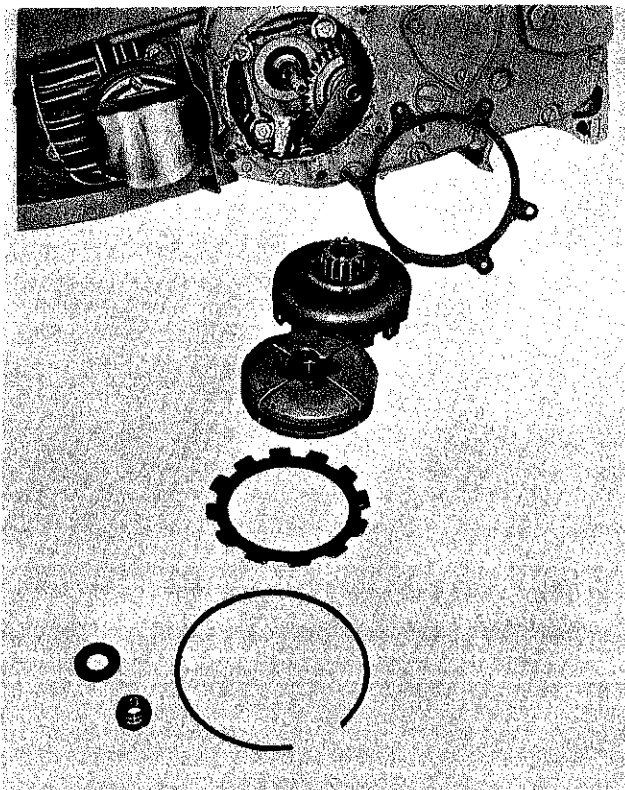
The clutch is removed from the engine by locking the flywheel against rotation, removing the clutch nut, and then pulling the clutch from the crankshaft with a pulling tool. After removal of the parts as illustrated, the clutch may be further disassembled for inspection and parts replacement.
